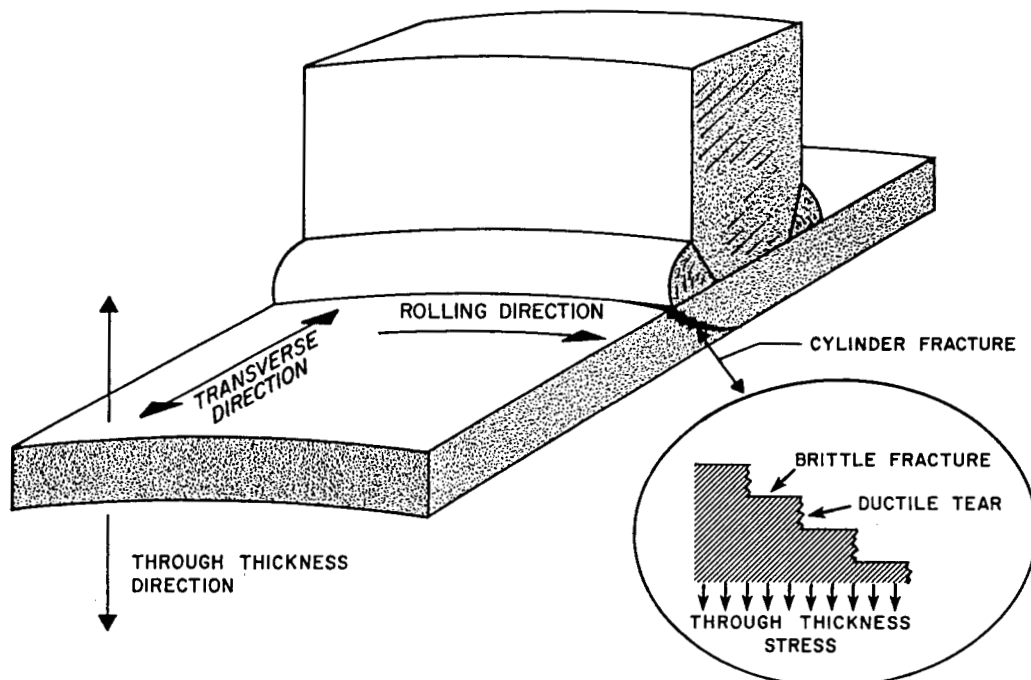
Location in Cylinder Fracture and Rolling Orientation of Shell Plate
